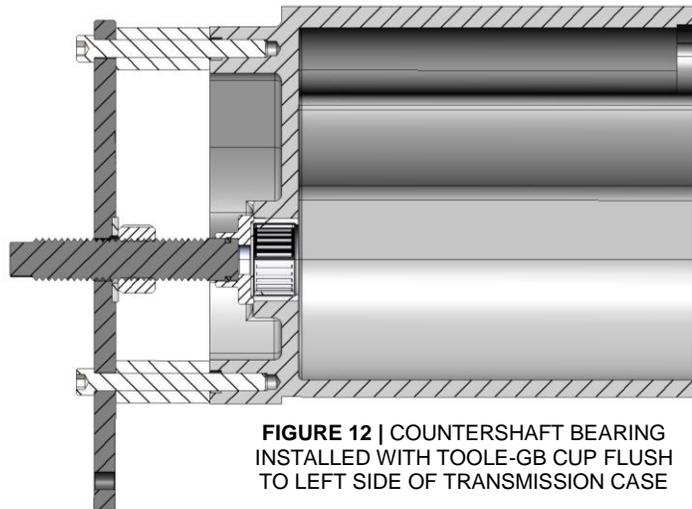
| COUNTERSHAFT BEARING INSTALLED WITH TOOLE-GB CUP FLUSH TO LEFT SIDE OF TRANSMISSION CASE
